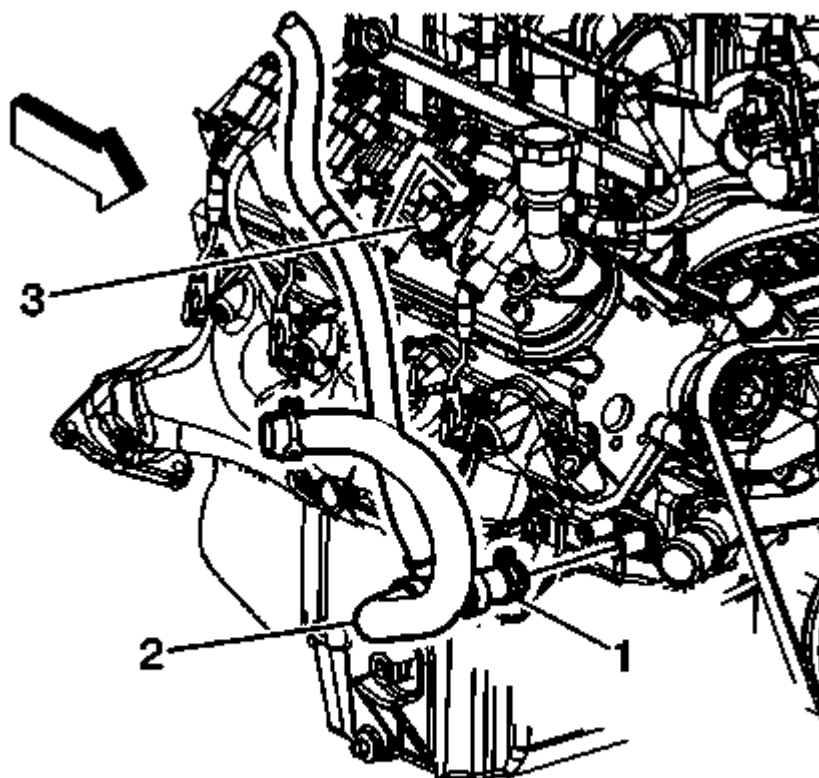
Heater Outlet Hose And Heater Hose Bracket
